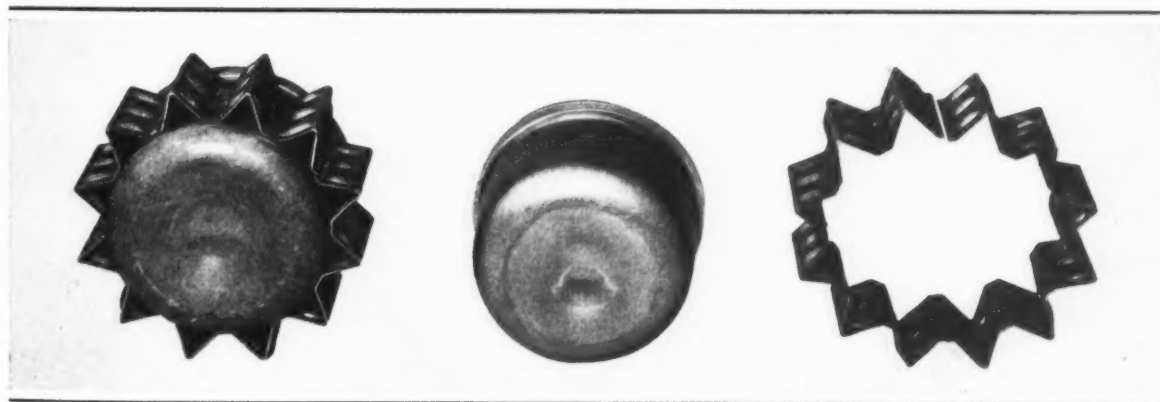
Completely Welded Refrigerator Motor Housing (at Left) and Two Stampings from which it is Fabricated
